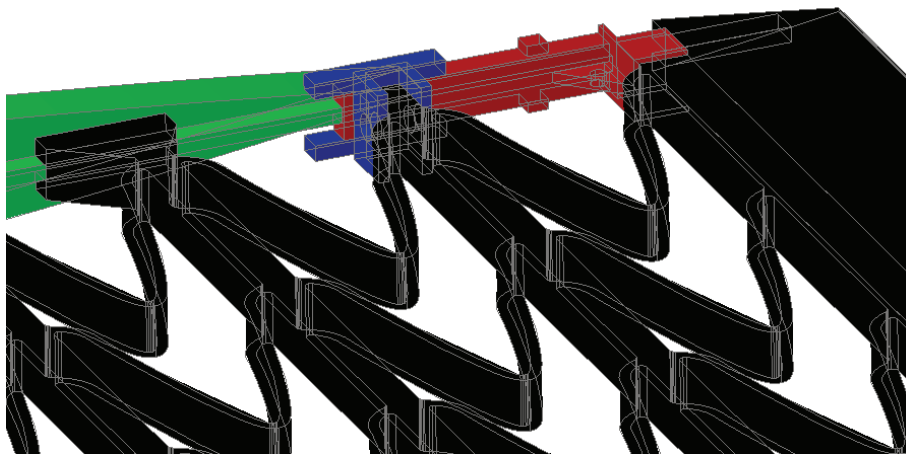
CAD model of assembled prototype: detail of the sliding supports near the trailing edge.
